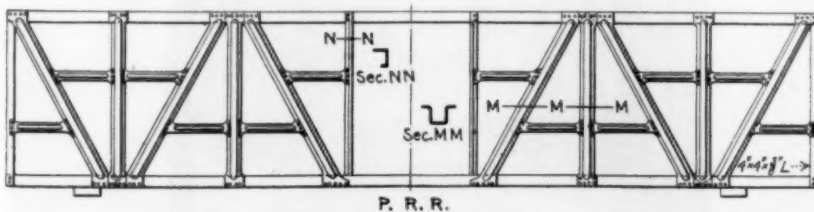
STEEL SIDE FRAMING USED ON P. R. R. CARS WITH SEVEN PANELS WITH END PANEL BRACING FROM BOLSTER TO SIDE PLATE AT END; PRESSED STEEL U-SECTIONS WITH FLATTENED ENDS FOR SECURING TO SIDE PLATE AND SIDE SILL
